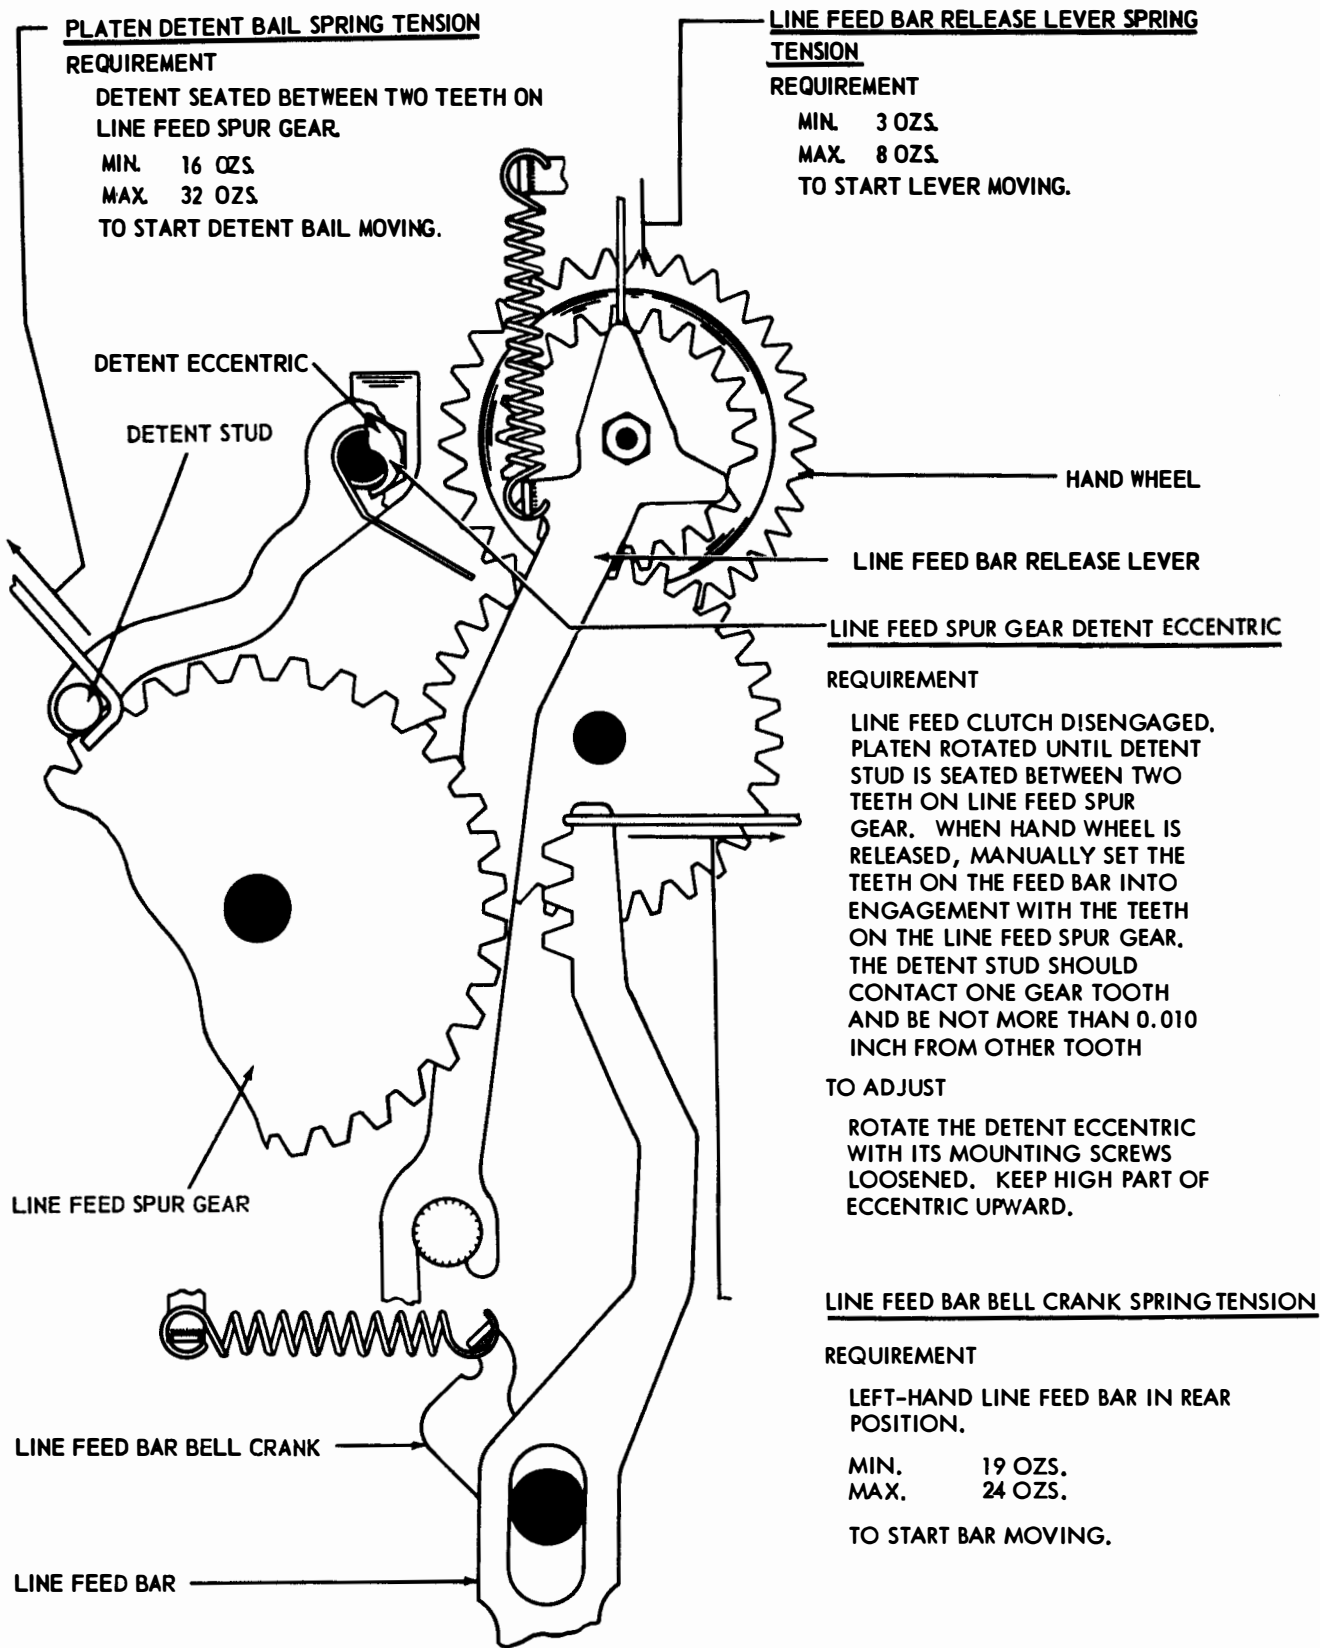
Automatic Typewriter, Line Feed Mechanism, Right Side View
